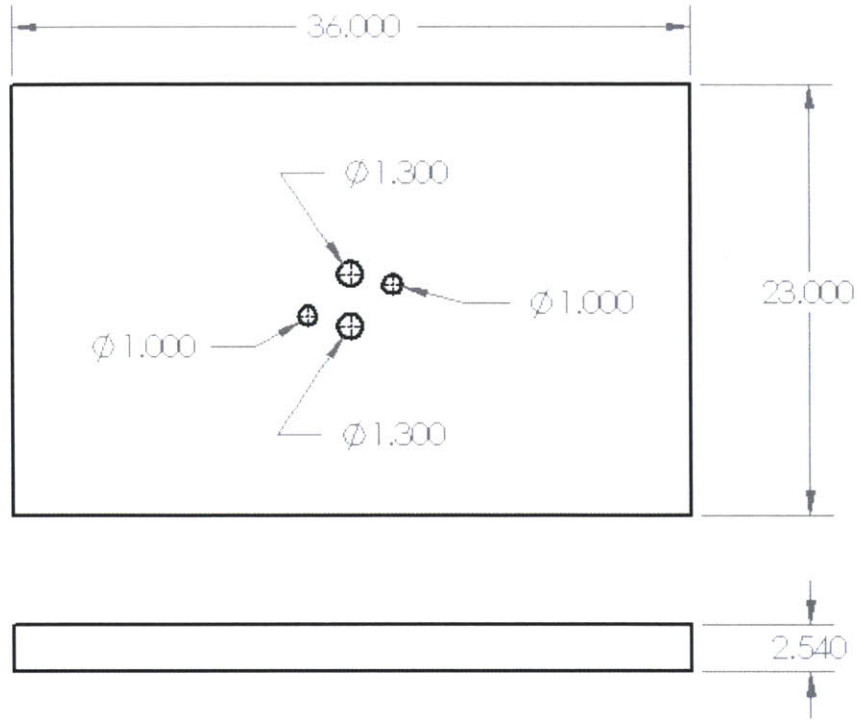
Top and side view of the lid used to seal the test section (dimensions in cm)
